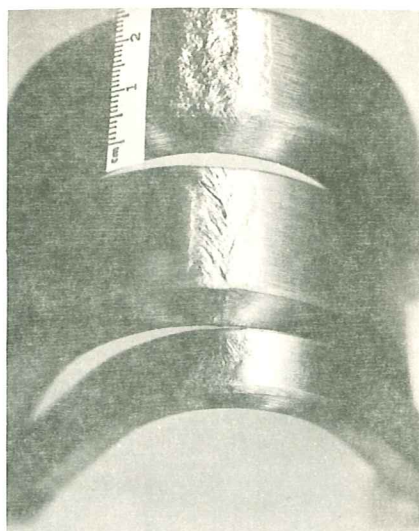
Typical guided bend test specimens (2T bend radius) of 800HT/556/800HT weldment.
